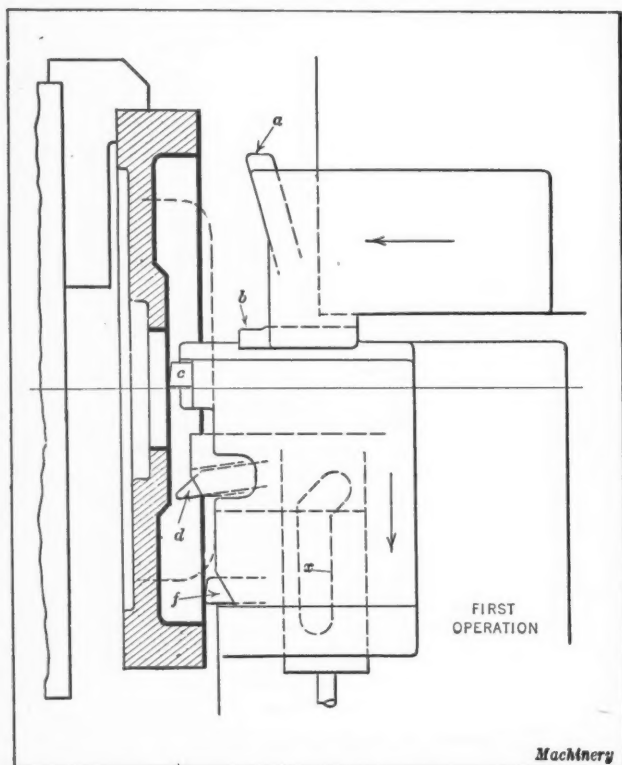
Diagrammatic Lay-out of the Tooling Equipment provided on the Machine illustrated in Fig. 1
